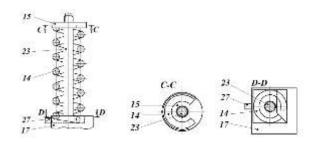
Cylindrical helical compression and torsion spring mechanism
